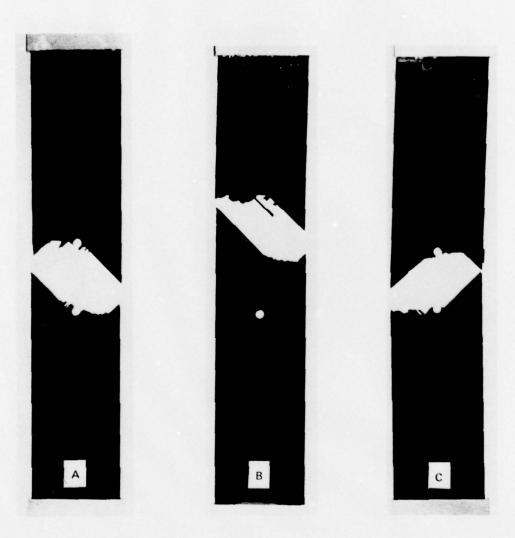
Fatigue failures of multi-directional $90\pm45^\circ$ CFC containing a 4mm diameter hole. The endurances to failure were; specimen (A) 4070400, (B) 289600, (C) 6990 cycles
